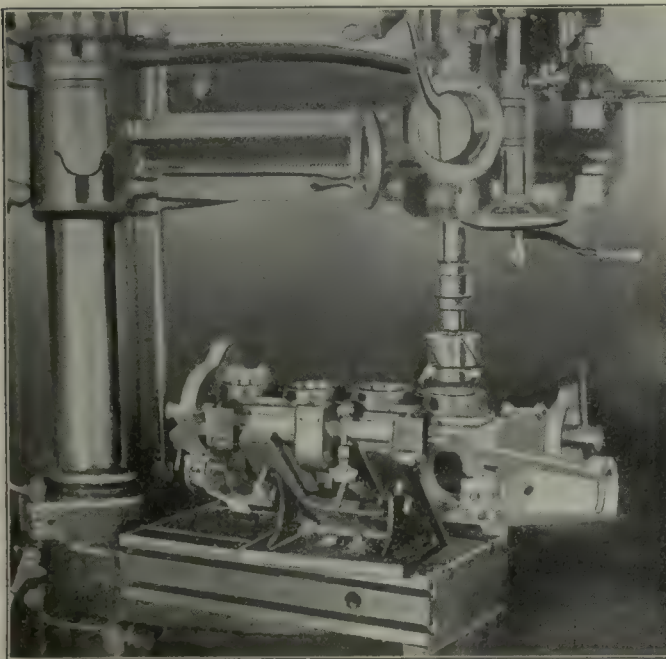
BORING CYLINDER HOLES IN CRANK CASE
